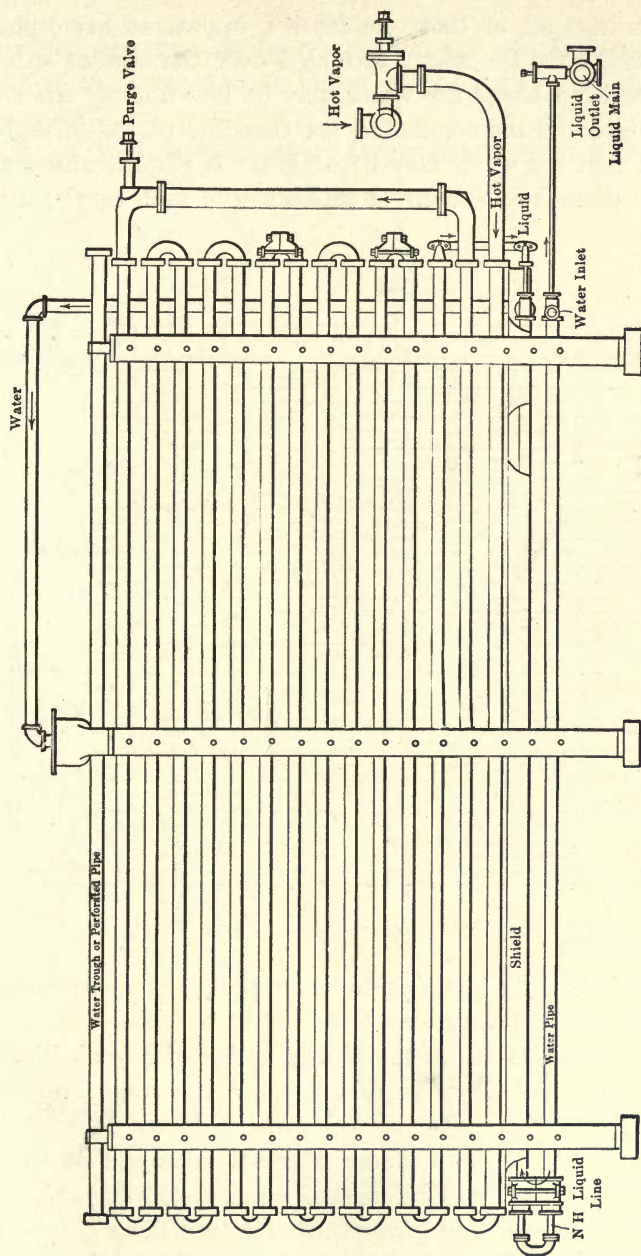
Frick Ammonia Condenser with Screwed Joints.
